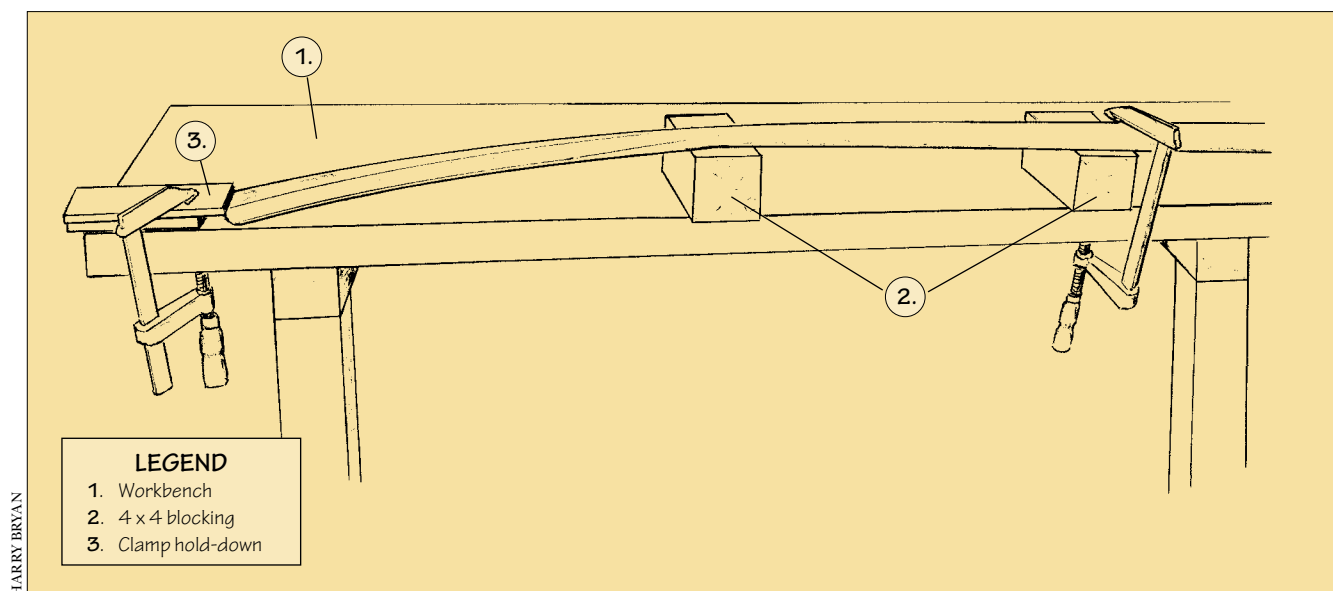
A simple benchtop steam-bending trap holds the oar blade curvature until the piece cools after steaming. The piece should be steamed for an hour and a half.
